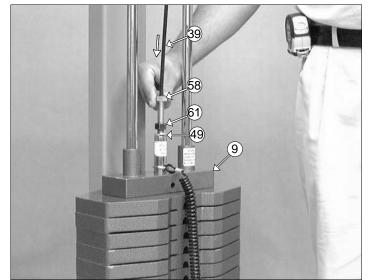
Connect the Cable (#39) to the Top Plate Selector Bar (#9) by threading the Finished Hex Nut 1/2-13 (#61) and inserting a Split Lock Washer 1/2" (#49) to the Cable Hex Tap Bolt 1/2-13 X 3 (#58). Then, thread the Cable Hex Tap Bolt 1/2-13 X 3 (#58) to the threaded socket of the Top Plate Selector Bar (#9).
